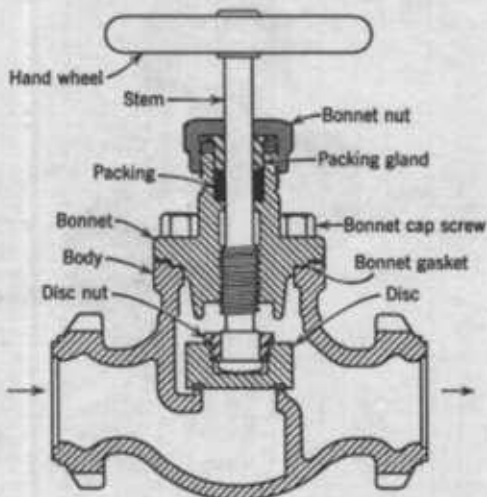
Packed-type manual valve. (Courtesy Vilter Manufacturing Company.)
